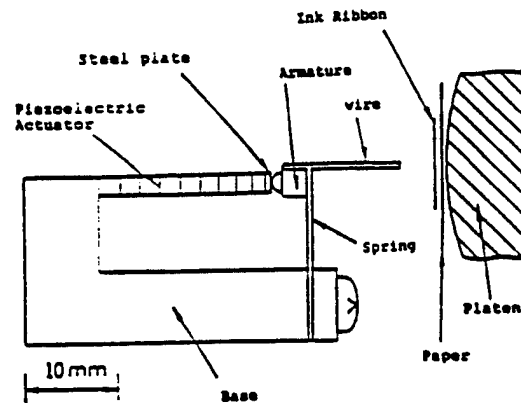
Dot-matrix printer head using a flight actuator mechanism.
